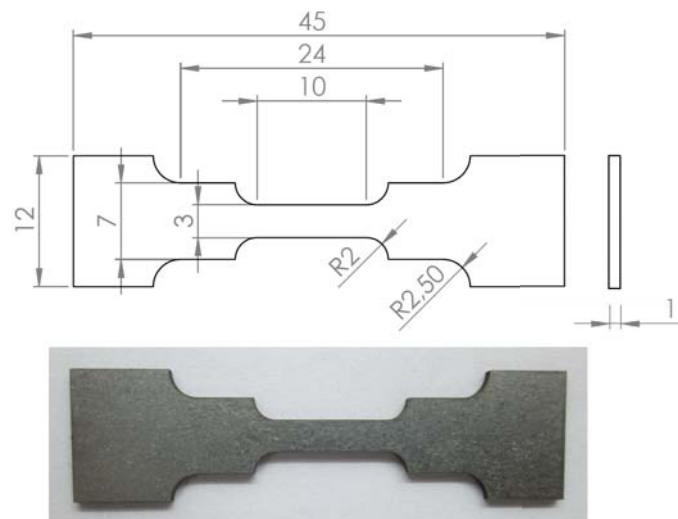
Nominal dimensions of NiTi tensile test specimen in rolling direction.
